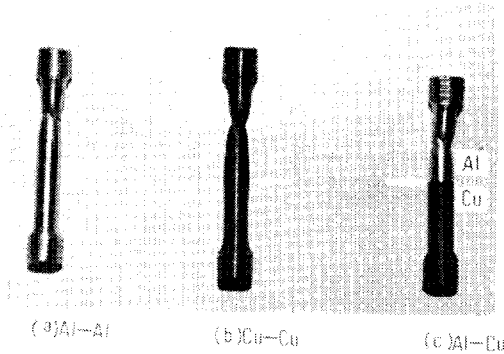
Examples of tensile test (Arrow: weld line)
